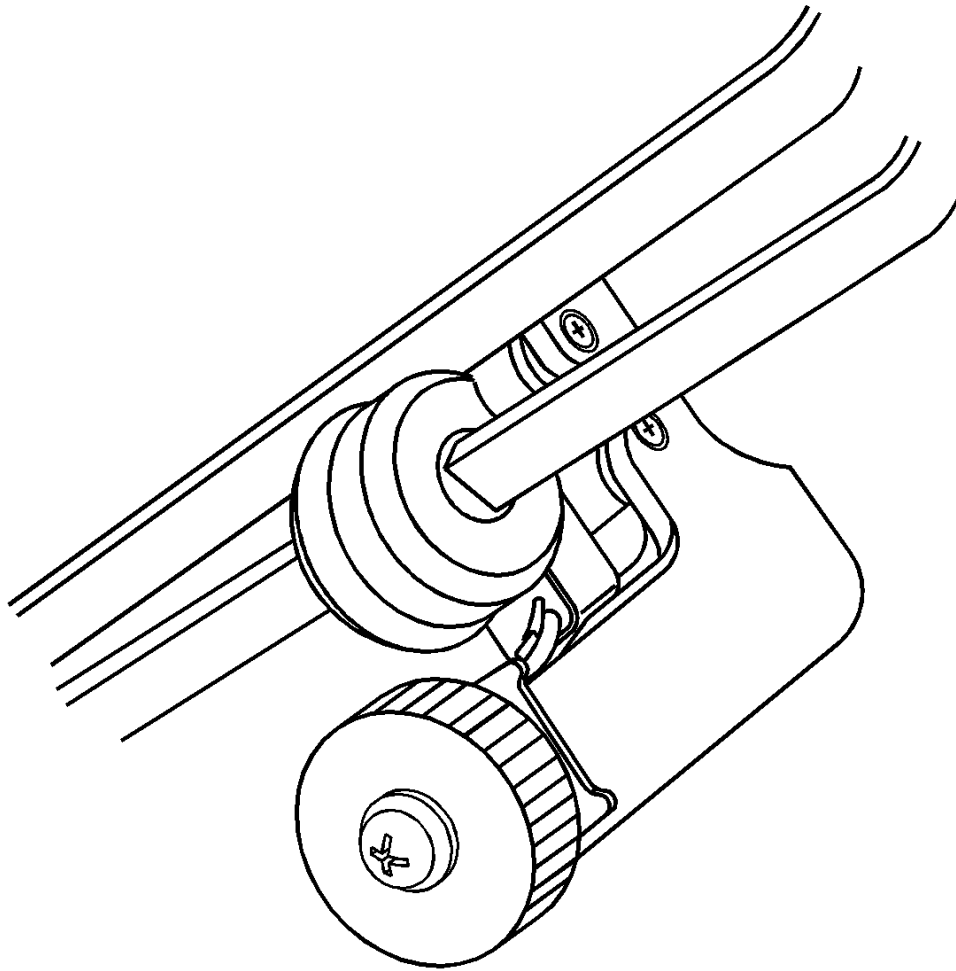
Sectioning Brake Pipe Using Pipe Cutter
